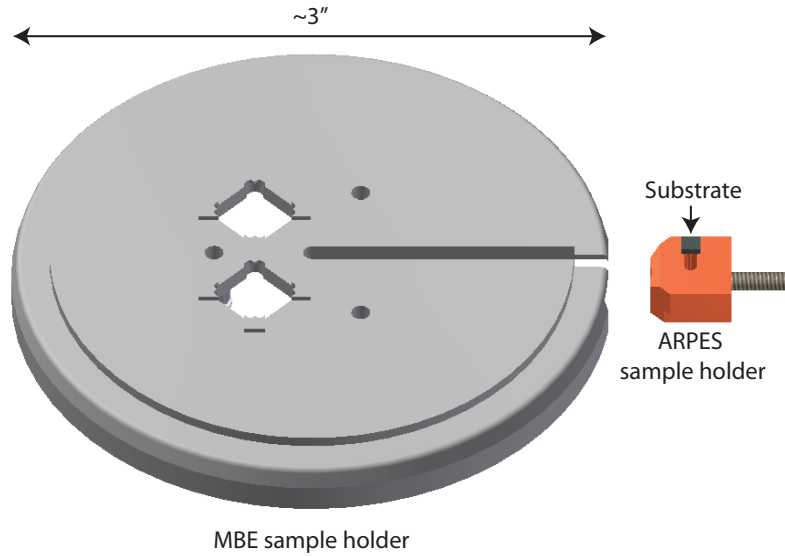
Schematic drawing of a joint MBE-ARPES sample holder. The outer disk, made of Haynes 214 is fits inside the MBE sample manipulator, which is designed to hold 3 inch semiconductor wafers. The Haynes sample holder can accommodate the Cu ARPES puck, along with two 10×10 mm companion substrates, used for *ex situ* characterization.
